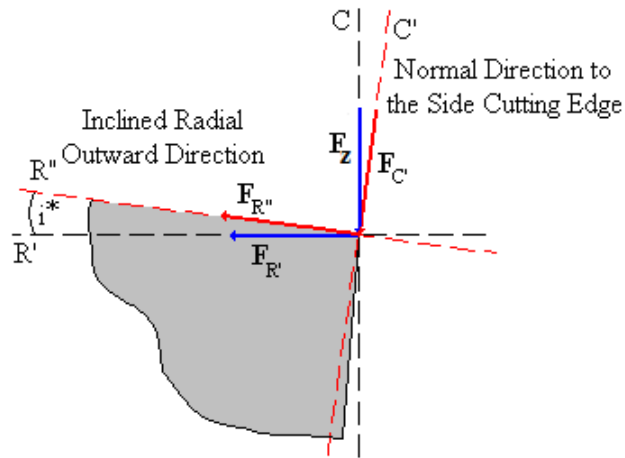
Planar view of cutting tool when projected in the modified axial direction
